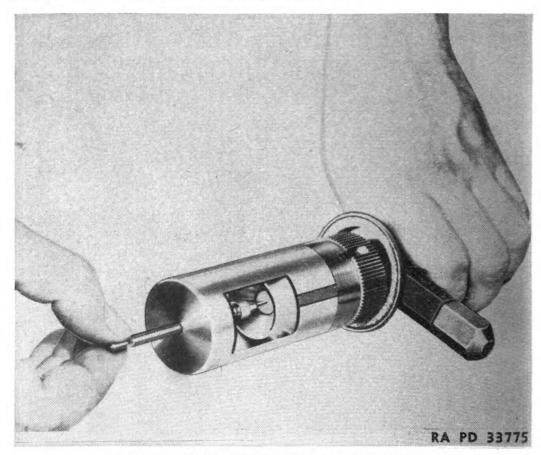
Cleaning fuel injection valve discharge hole.
